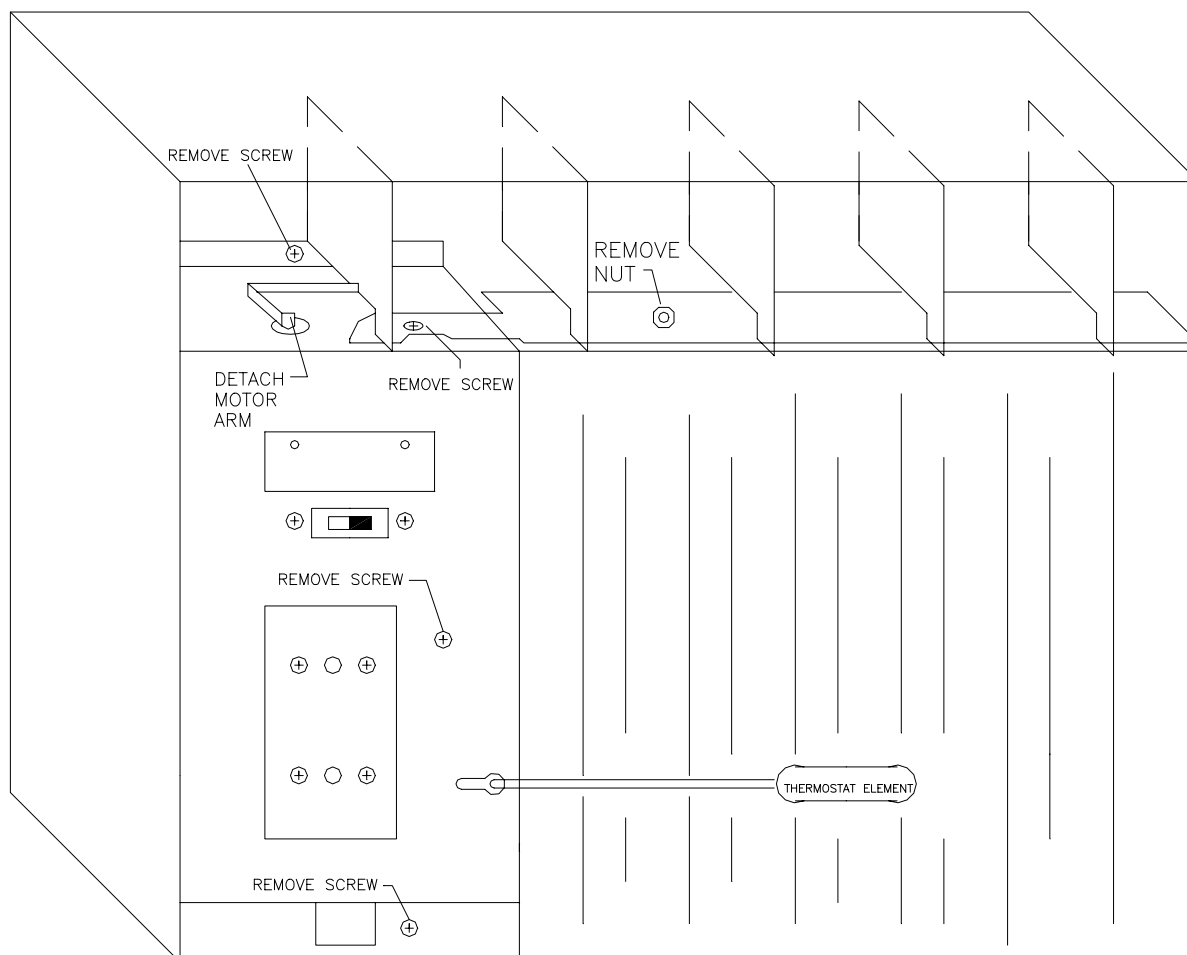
ECU with Front Cover Panel and Air Filter Removed
